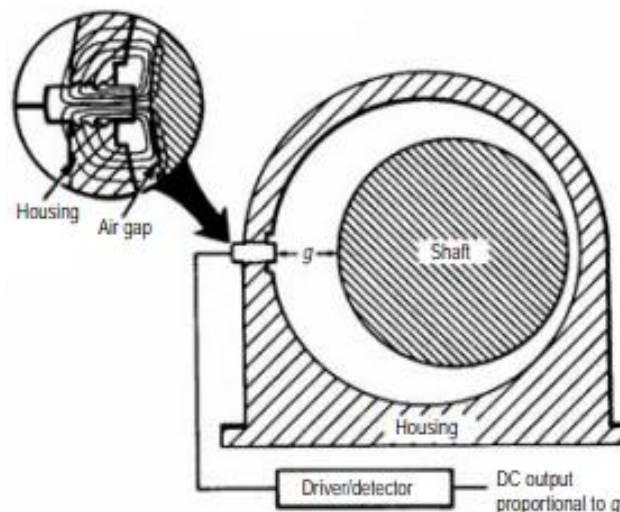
Experimental apparatus for vibration measurements in electrical machines [3]
